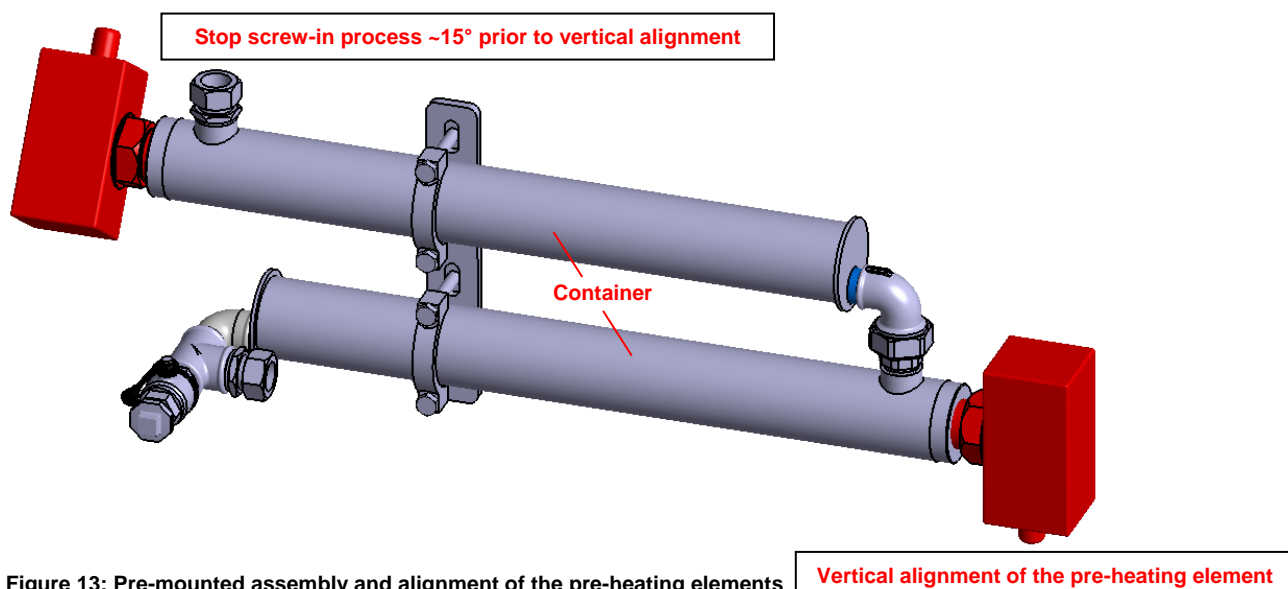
Pre-mounted assembly and alignment of the pre-heating elements
